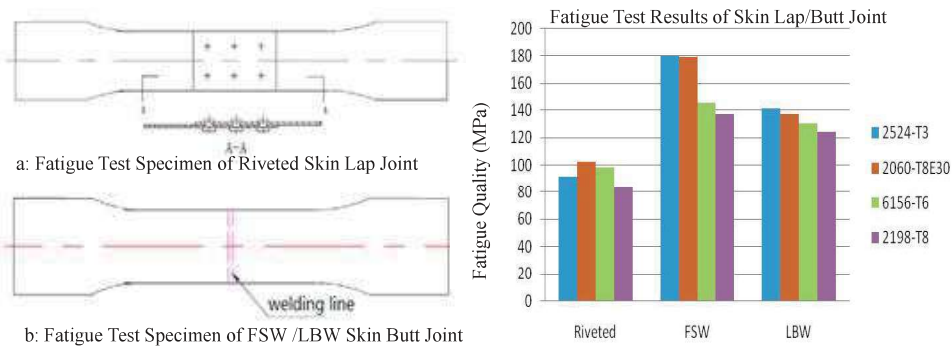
Test Results of Riveted Skin Lap Joint / Welded Butt Joint
